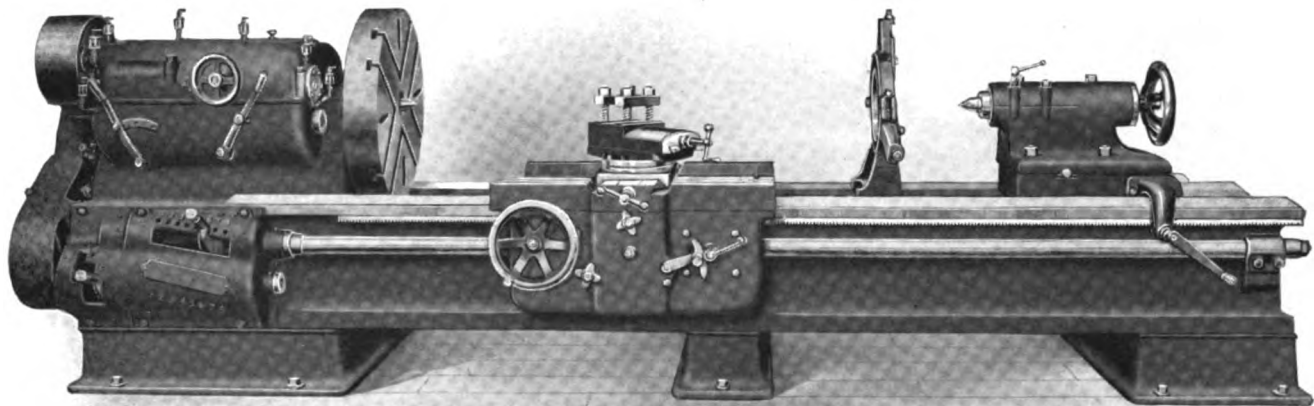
Pittsburgh Thirty-two Inch Geared Head Lathe
